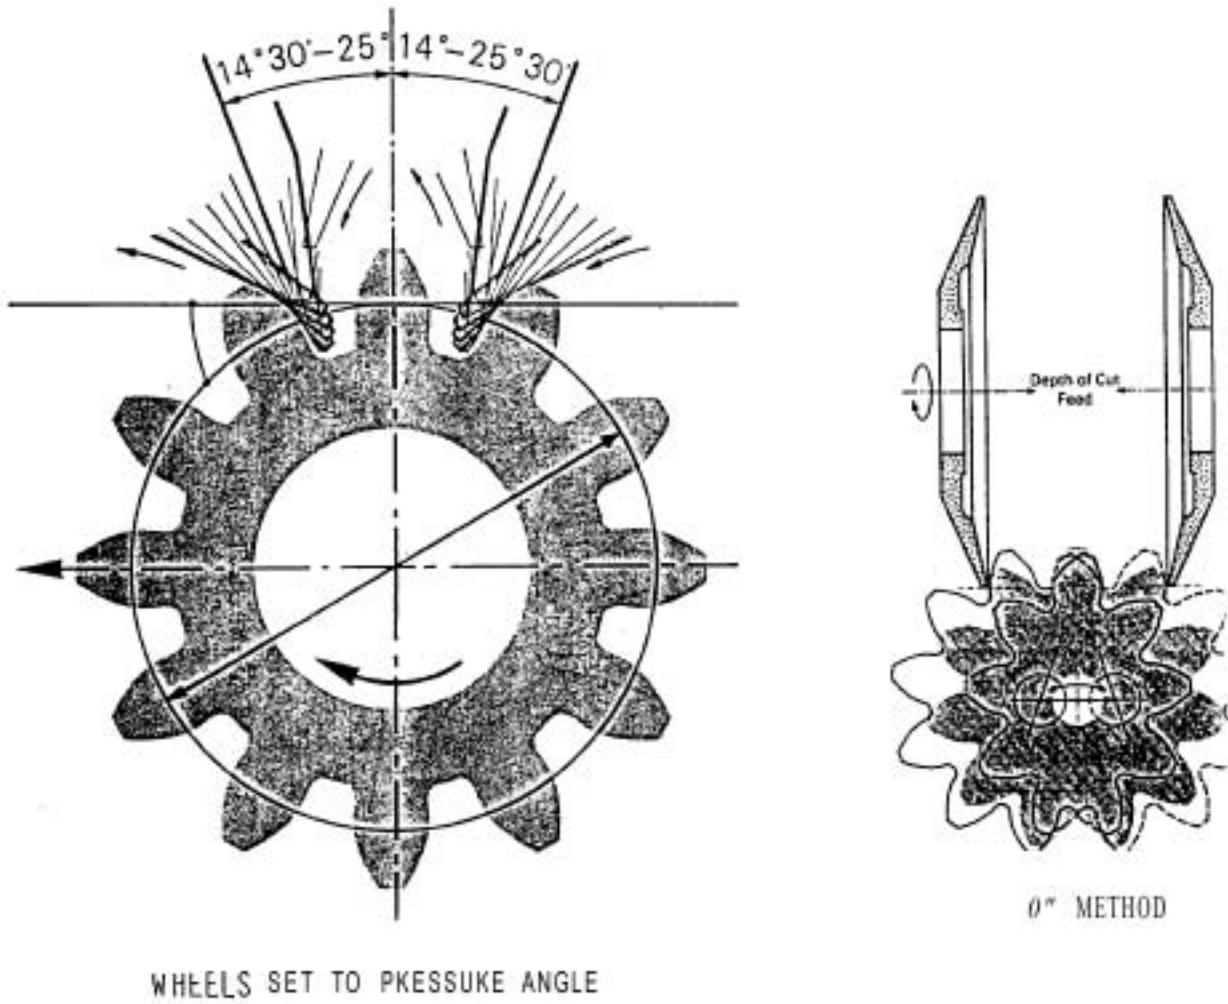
Saucer Shaped Wheel Gear Grinding Method
